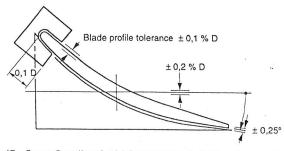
Runner/impeller of axial flow machine, Definition of blade adjustment . and of blade profile tolerances
